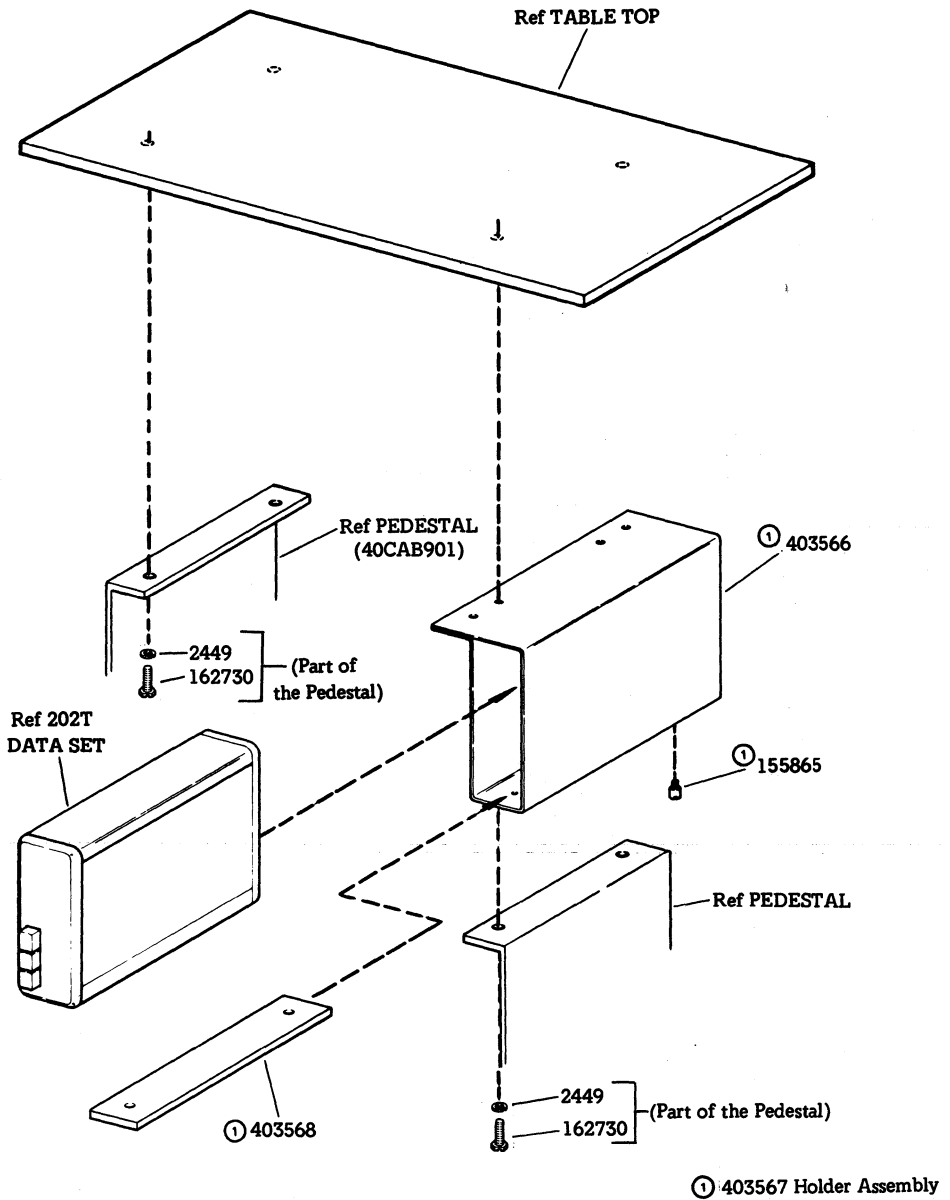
403567 Holder Assembly for Mounting a Data Set 202S or 202T to a Pedestal Type DATASPEED 40 Cabinet
